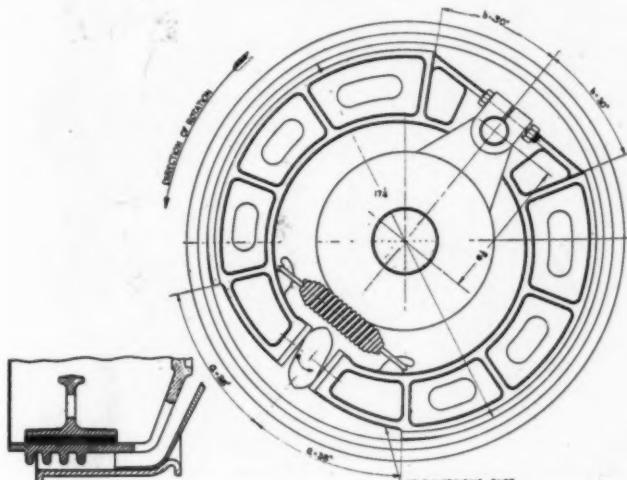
Dimension Drawing of Two-Shoe, Internal Expanding Brake
